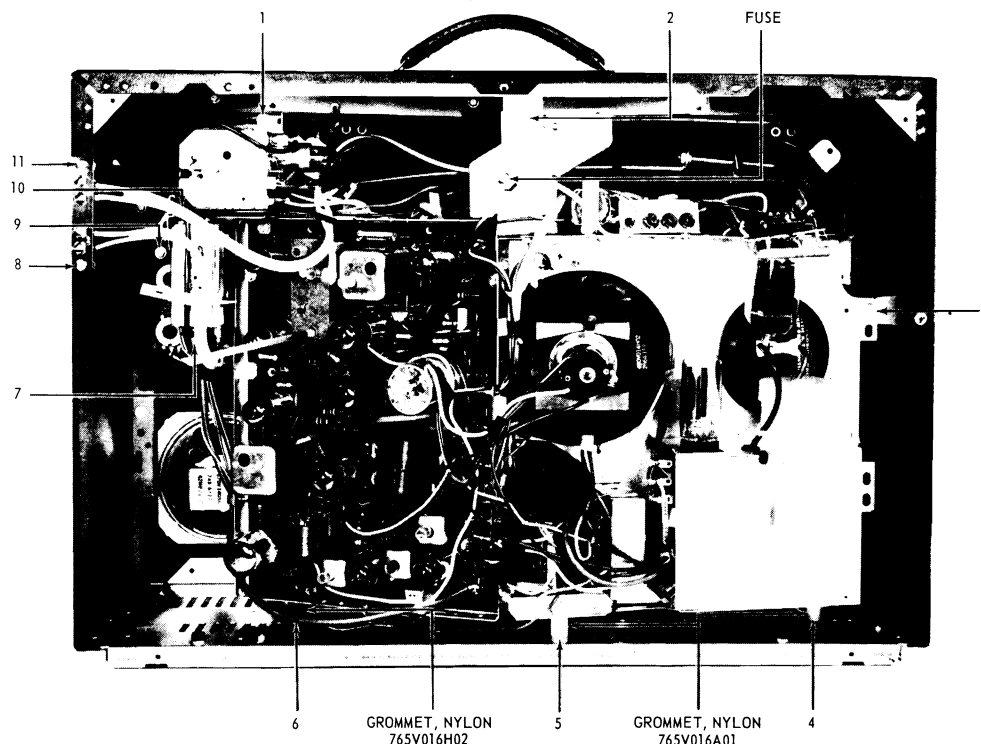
Rear view of 19" chassis, showing location of screws for chassis removal.
